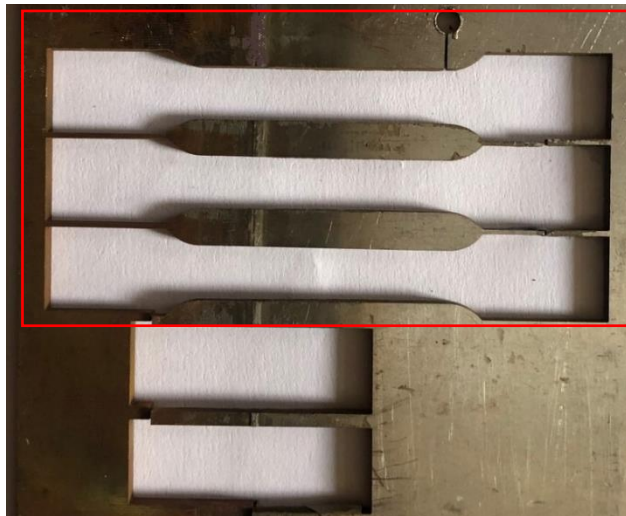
Skeleton of specimen extraction for cross weld tensile testing
